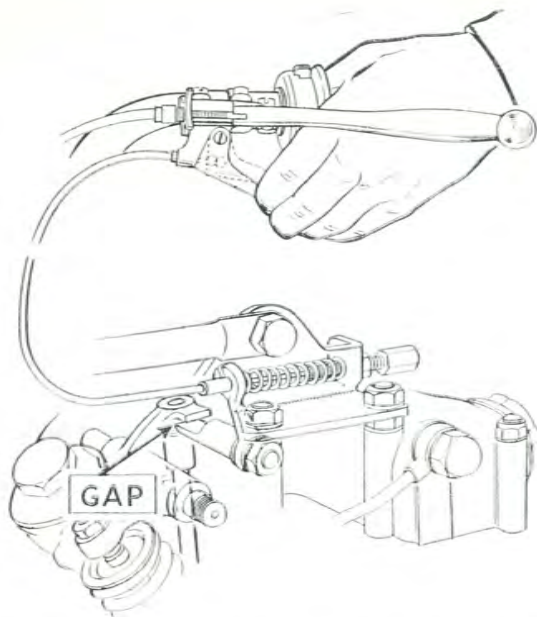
Exhaust valve lifter clearance (Shooting Star and Victor Special).
